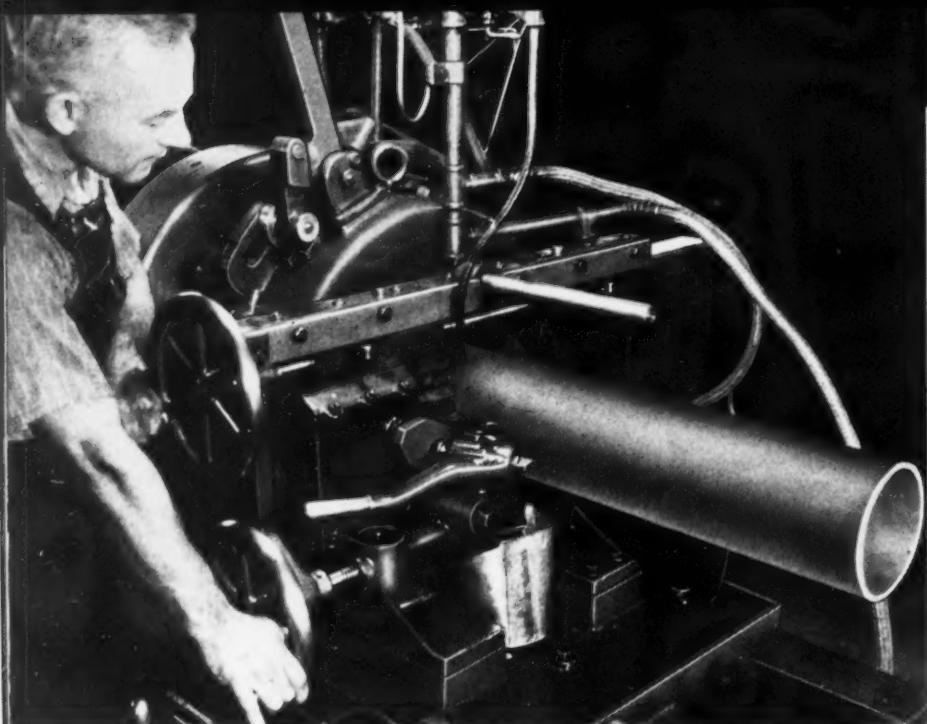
Cutting-off and Reaming Side of Carriage on Machine Shown in Fig. 7, which also Carries the Die-head
